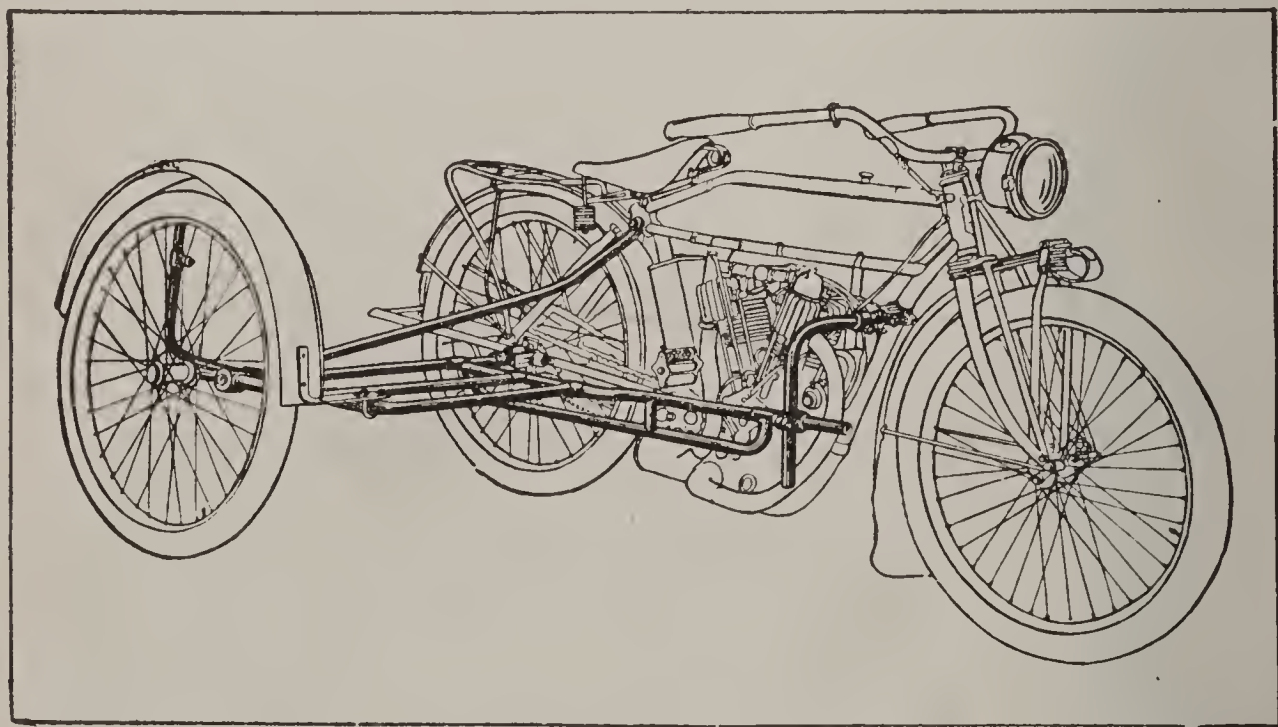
Typical Side Car Chassis With Body Removed, Showing Method of Attaching to Standard Motorcycle.
